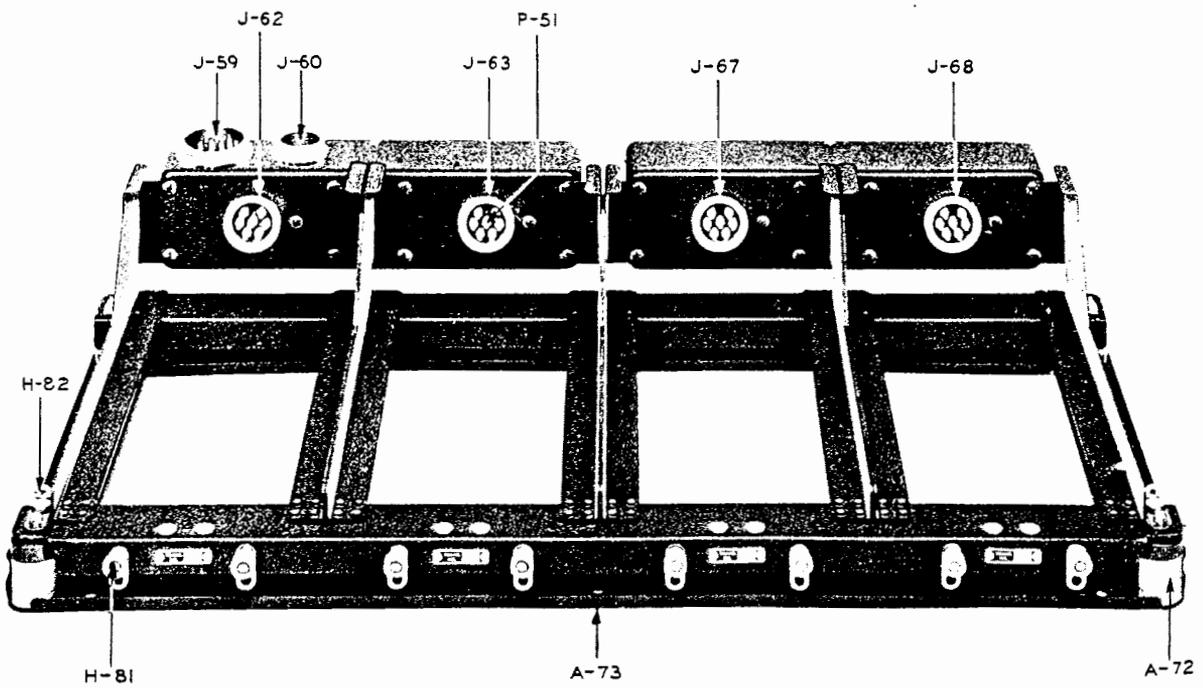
B—RACK FT-331-A AND MOUNTING FT-332-A, FRONT VIEW
